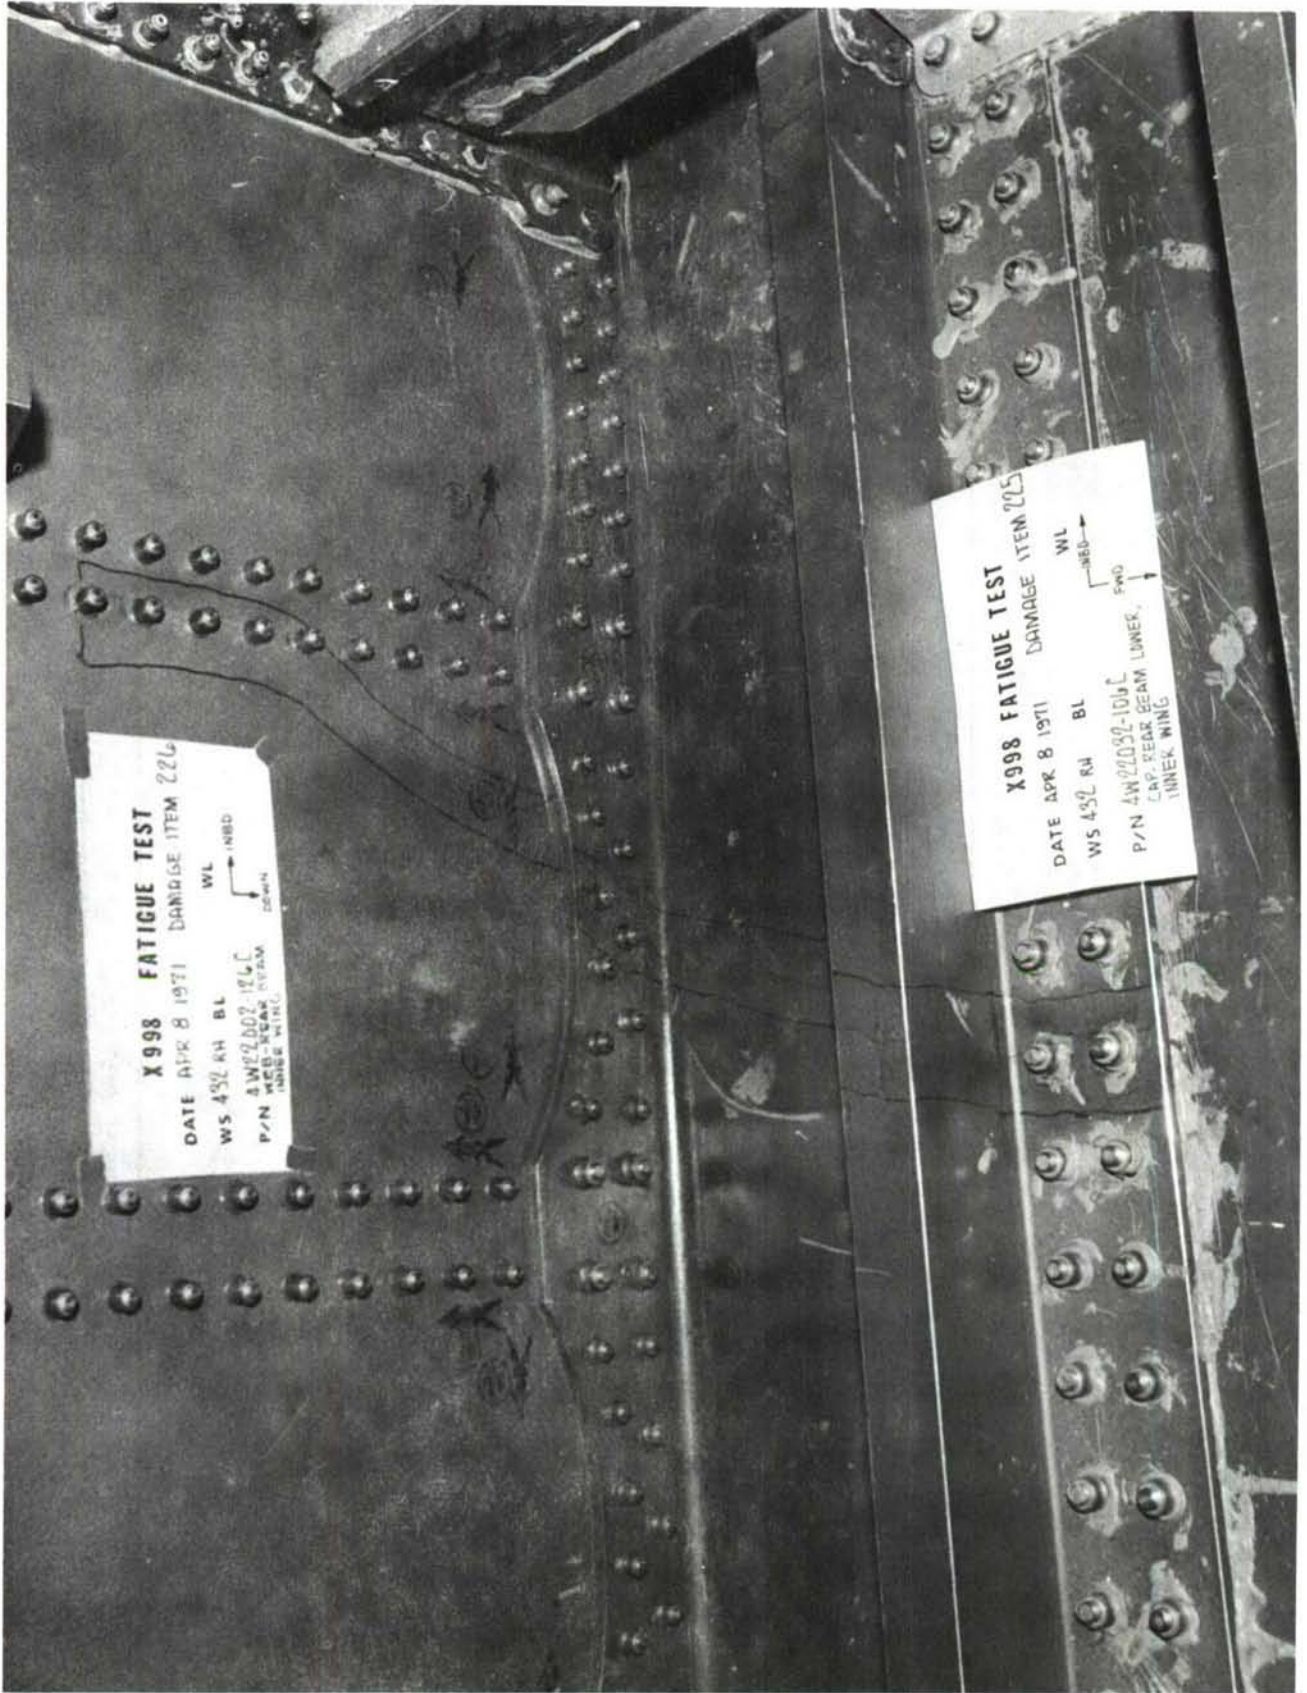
DAMAGE TO INNER WING REAR BEAM AND BEAM CAP INSIDE SURFACE
